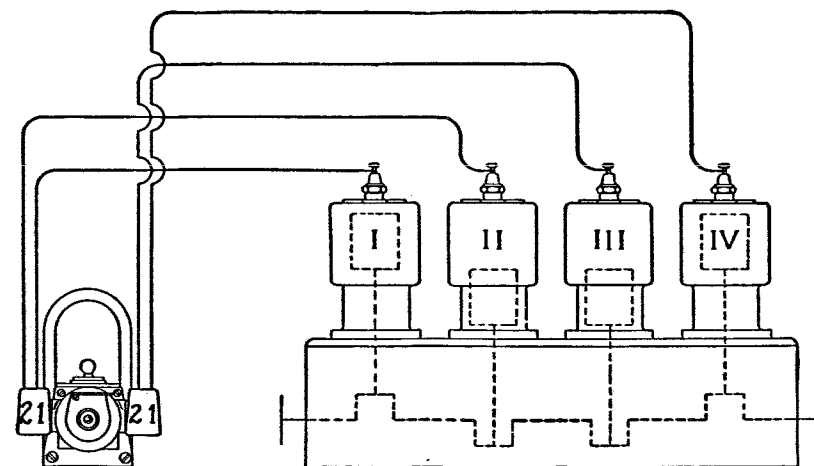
Wiring Diagram of the NU4 Magneto for Gear Driven Bosch-Ford Attachment.
